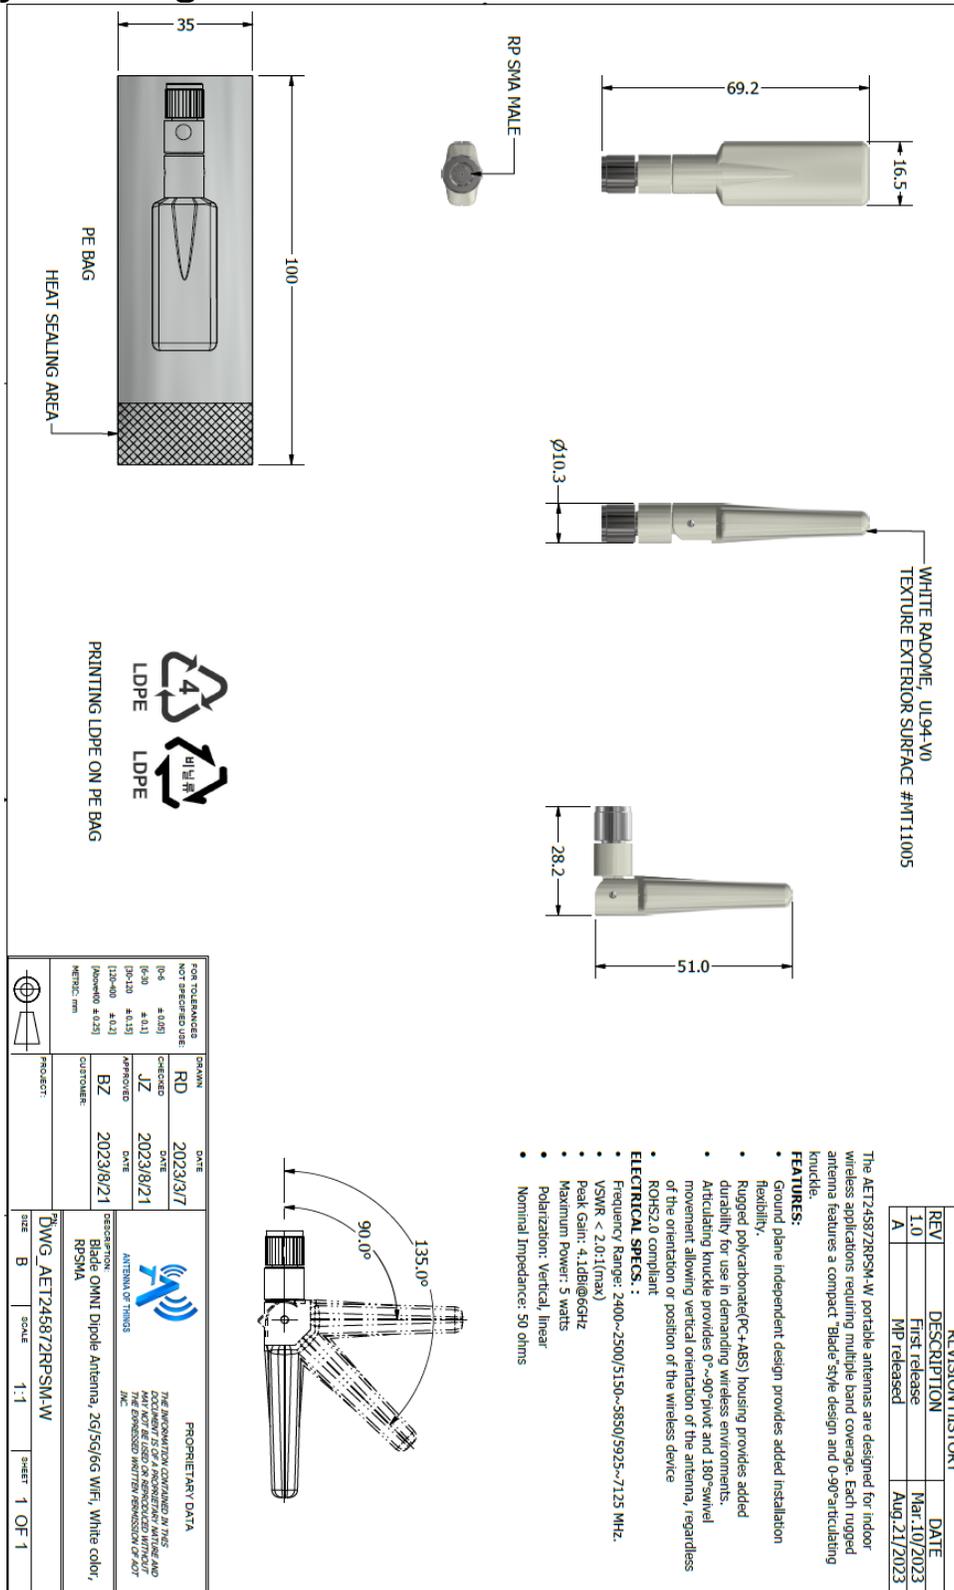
Model AET245872RPSM-W Antenna Assembly Drawing
